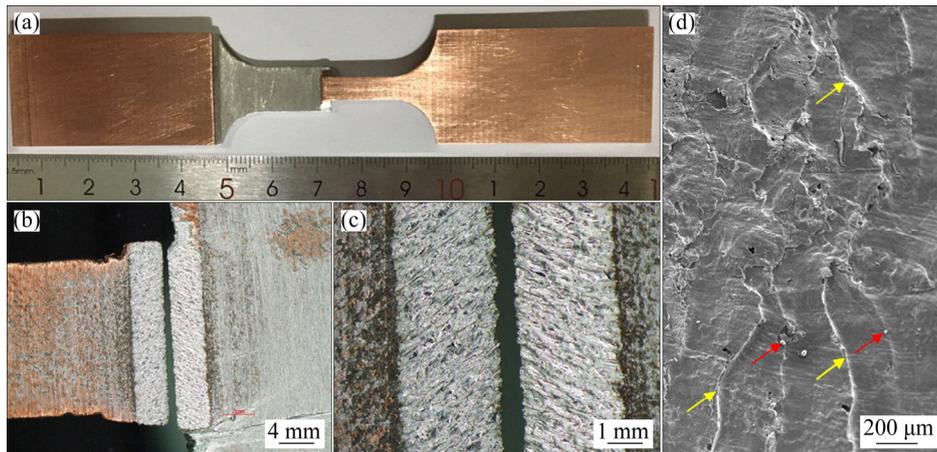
Fracture morphologies of shear specimens: (a) Shear samples; (b–d) Fracture morphologies
